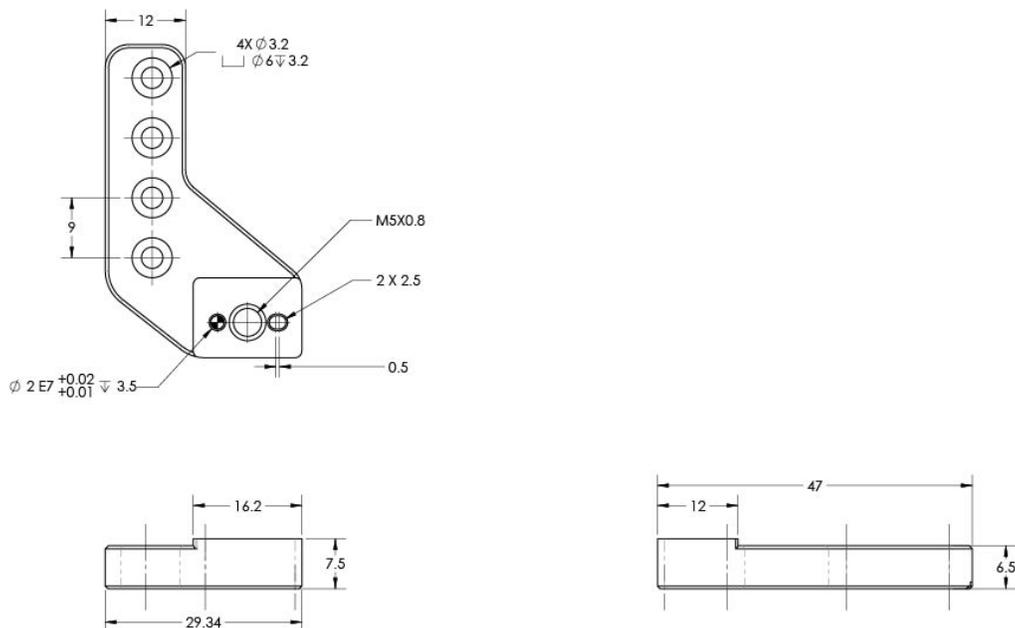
Adjustable Fingertip Holders technical dimensions
